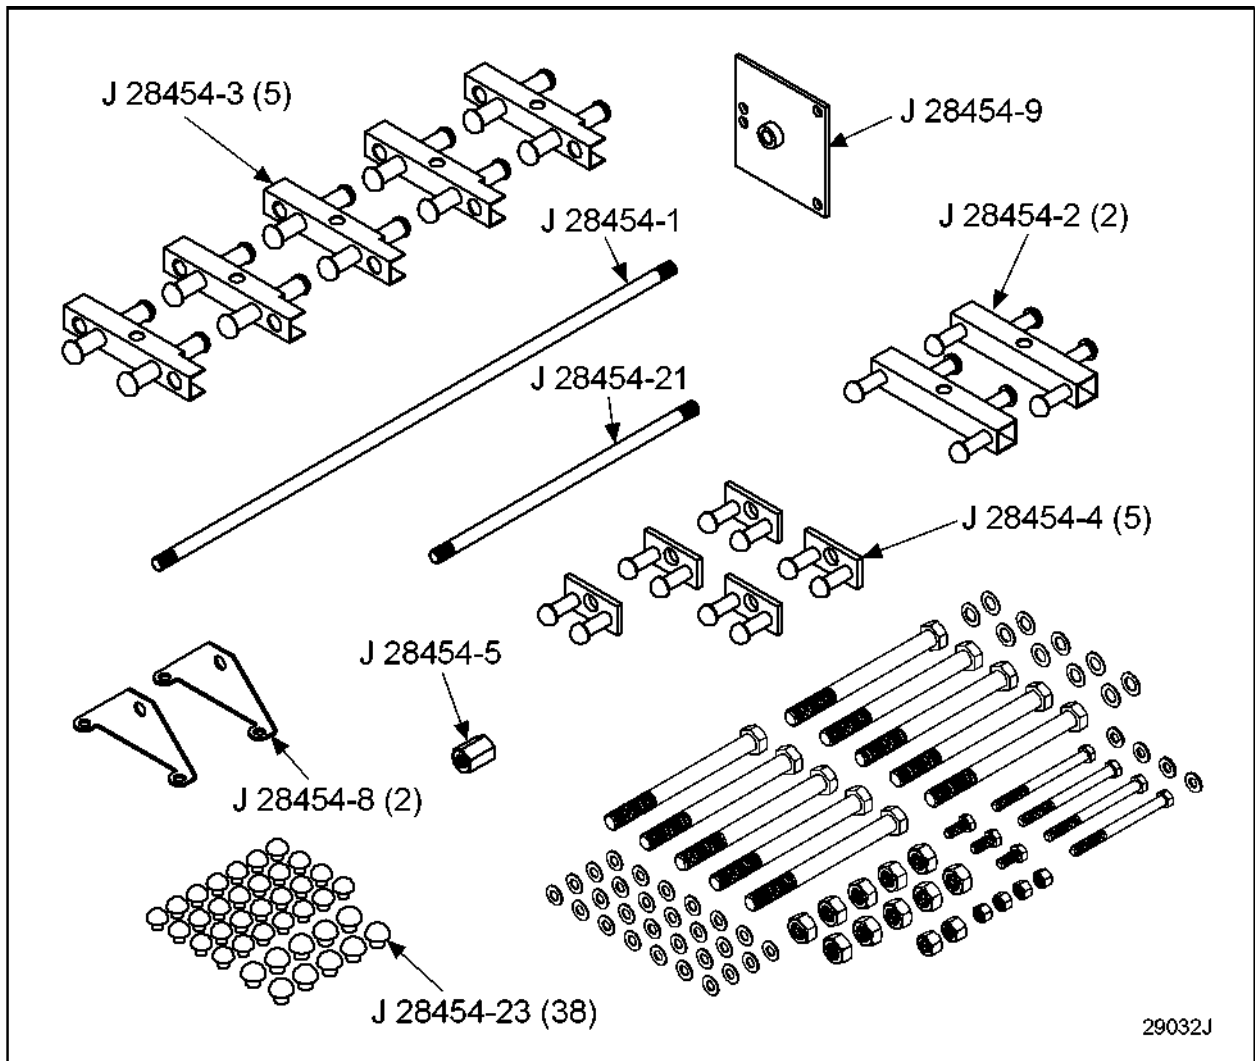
Cylinder Head Pressure Test Fixture, J 28454
